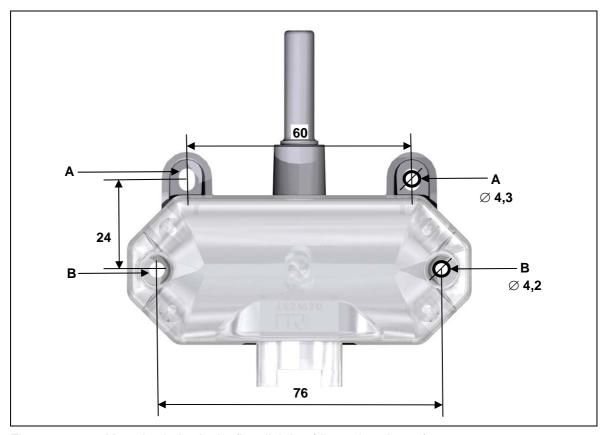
Mounting holes in the floor lighting (dimensions in mm)
